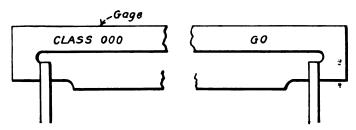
Solid Gage Used to Measure the Limits When Making New or Repairing Old Piston Valve Spools
